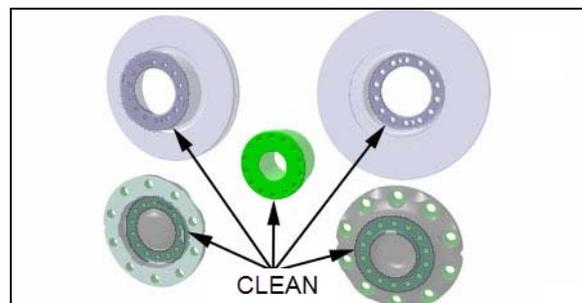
CLEANING HUB BEARING, ROTOR AND HUB FLANGE CLAMPING SURFACES
